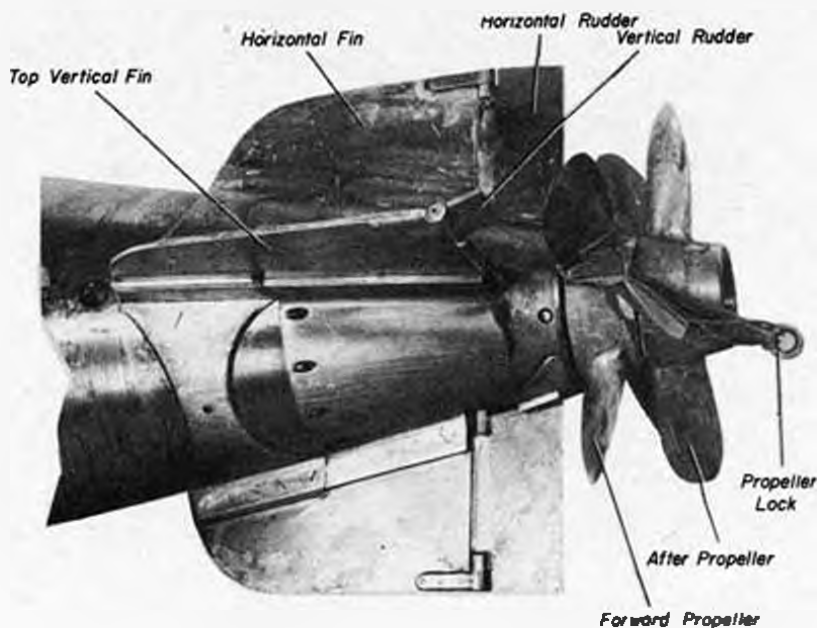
Fig C - U.S. Torpedo Mk 13-3, Tail Section
